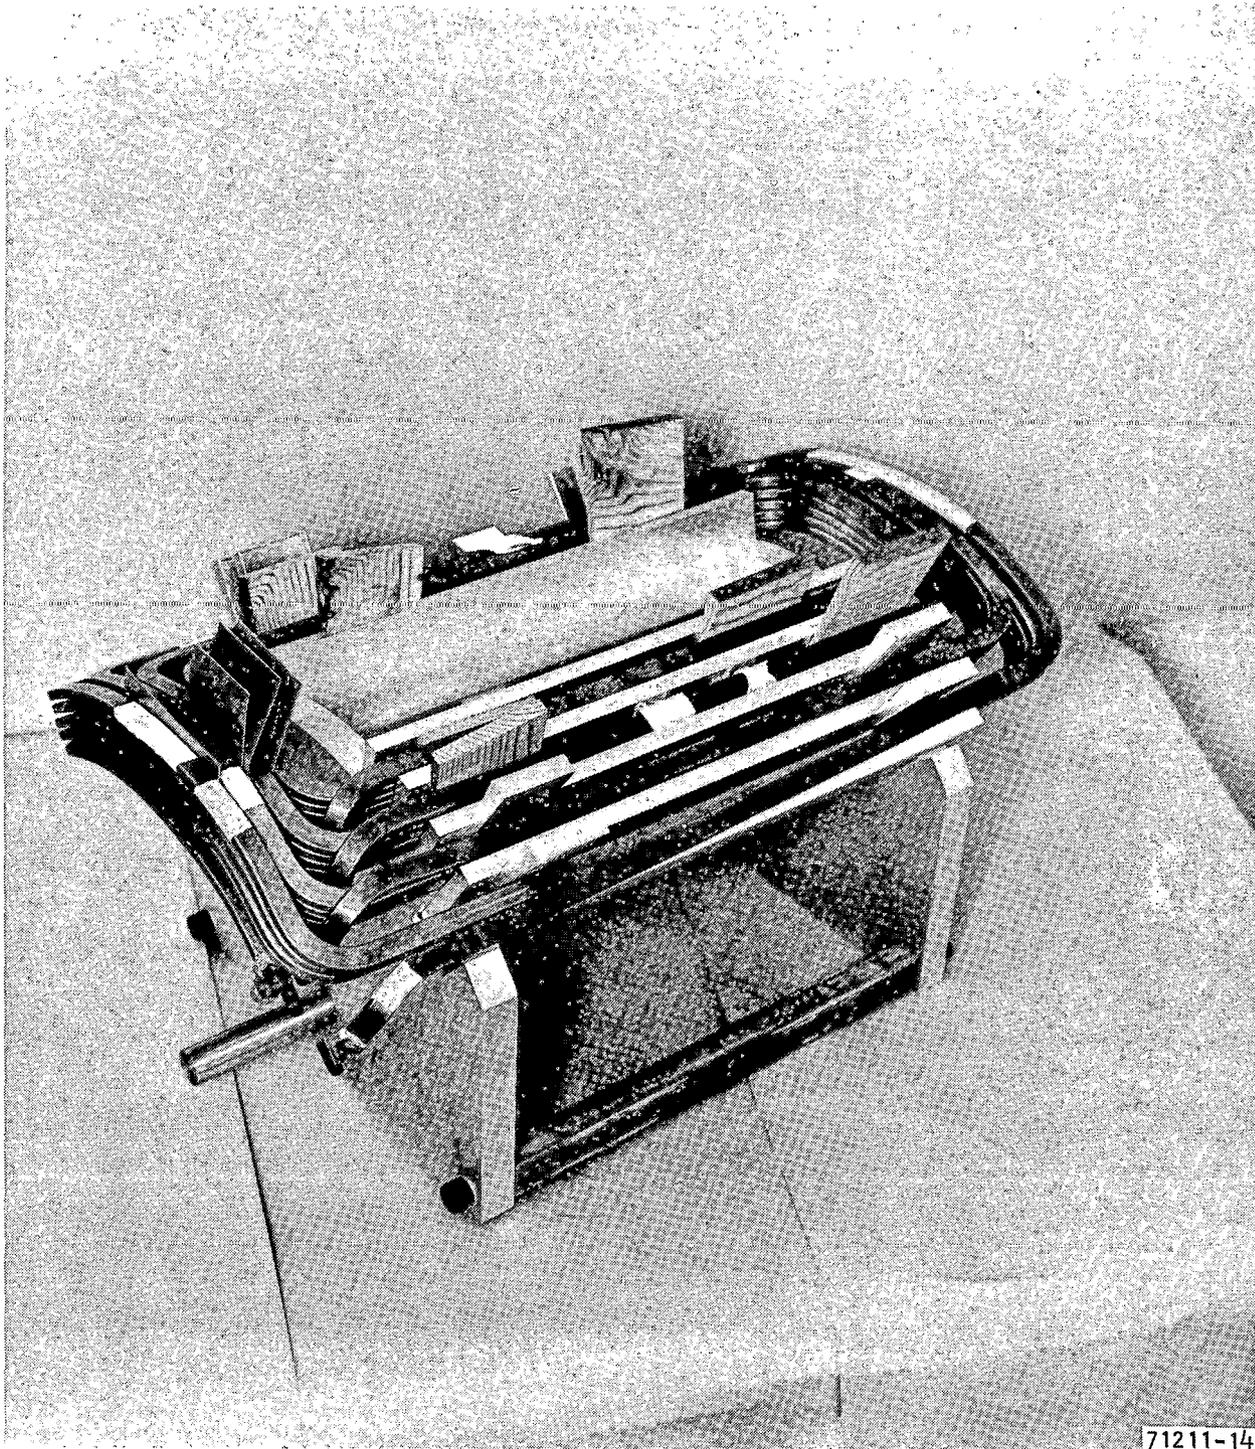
Rotor Coils in Inspection Fixture
